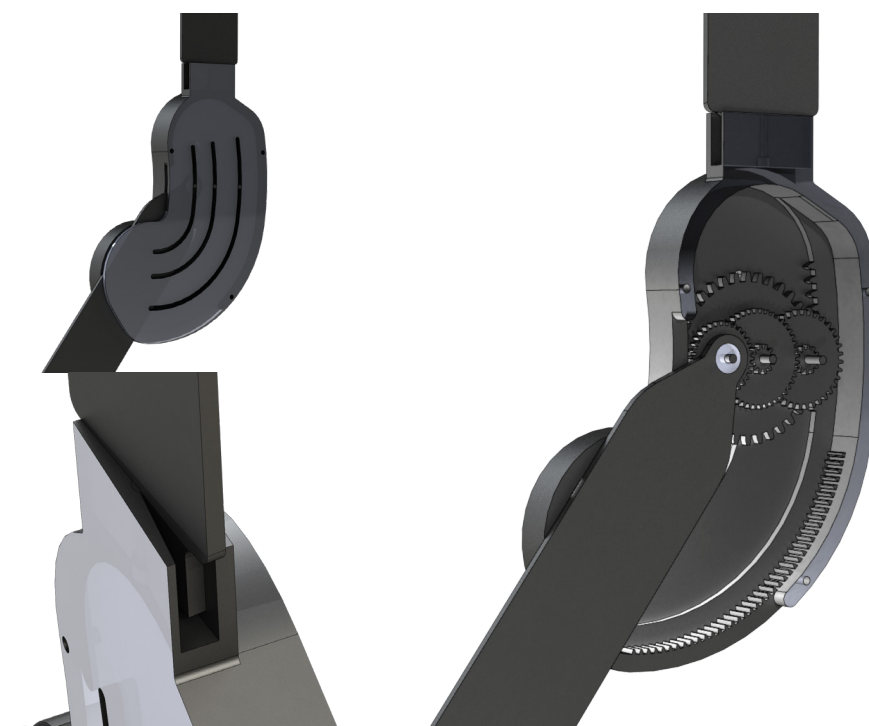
Gear concept (top left), its rotation part (bottom left) and details of the gears and variation (right)
